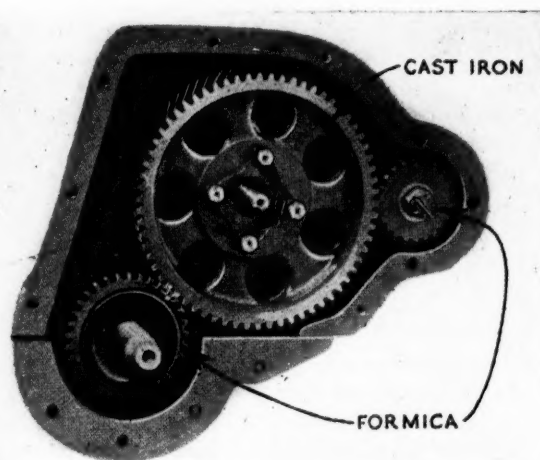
A three-gear train with cast iron camshaft gear and Formica crankshaft and generator gears used on engine for Lexington cars
